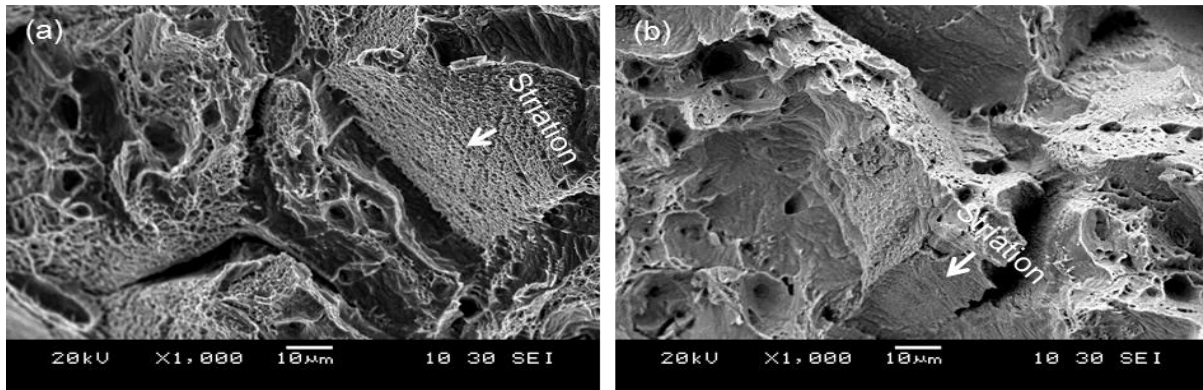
Fatigue fracture surface of IN601 (a) in air, and (b) in 3.5%NaCl solution at pH = 6.8
